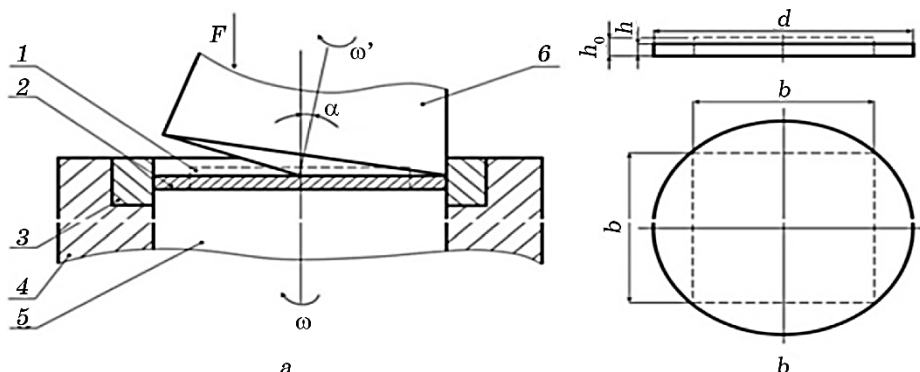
Scheme of reshaping of workpieces by the SR method (a), view of the original square and rolled round workpiece (b): 1—workpiece, 2—product, 3—matrix, 4—spindle, 5—ejector, 6—roll.
